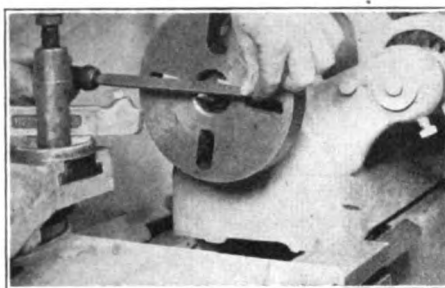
Remove Tool Marks With Dead Smooth File and Polish With Fine Carborundum Cloth.
